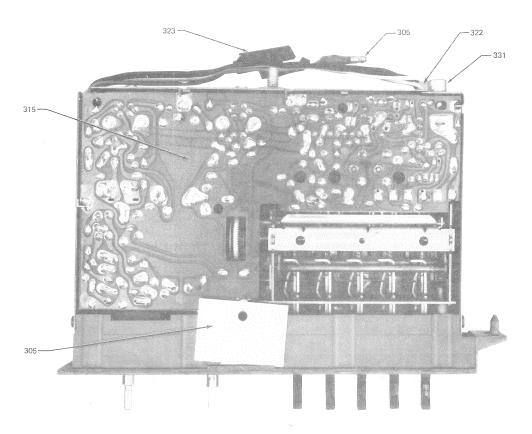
PARTS LOCATION, TOP VIEW (3501457 and 3501458)
